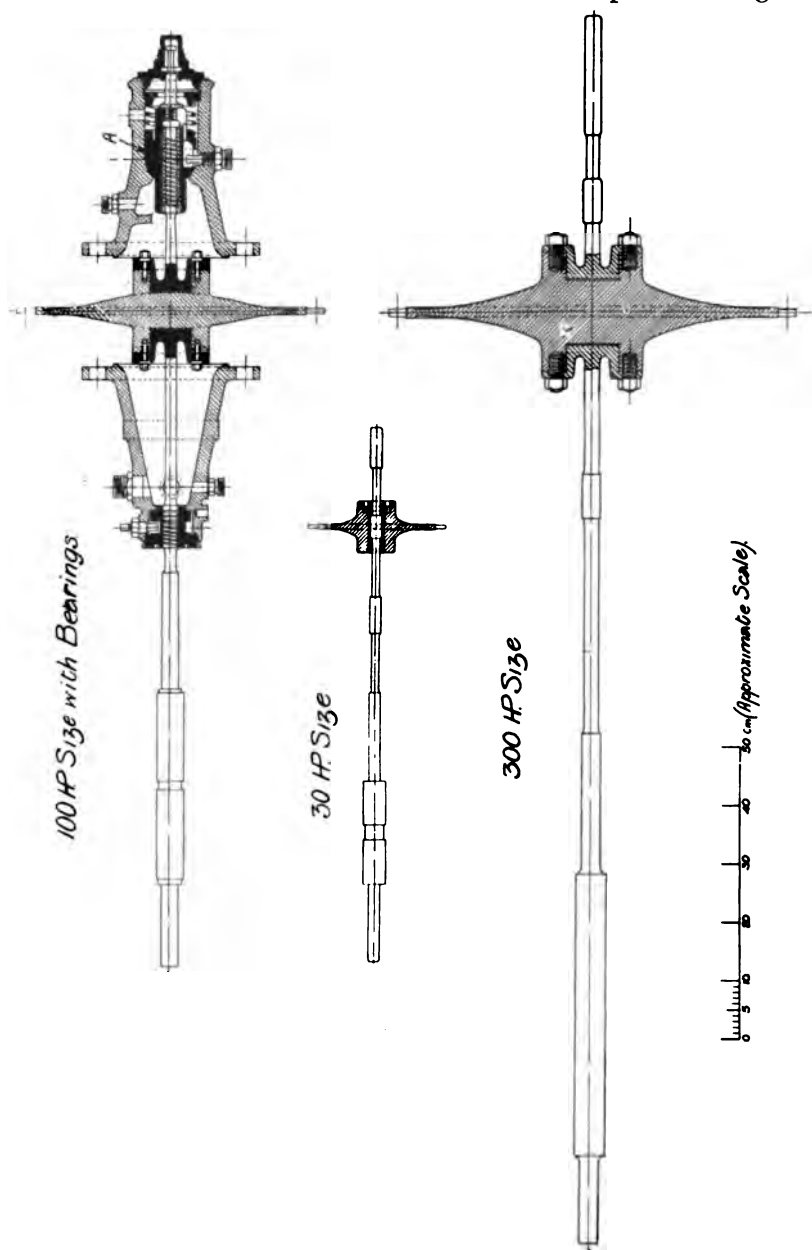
Shafts and Wheels of de Laval Steam Turbines.
